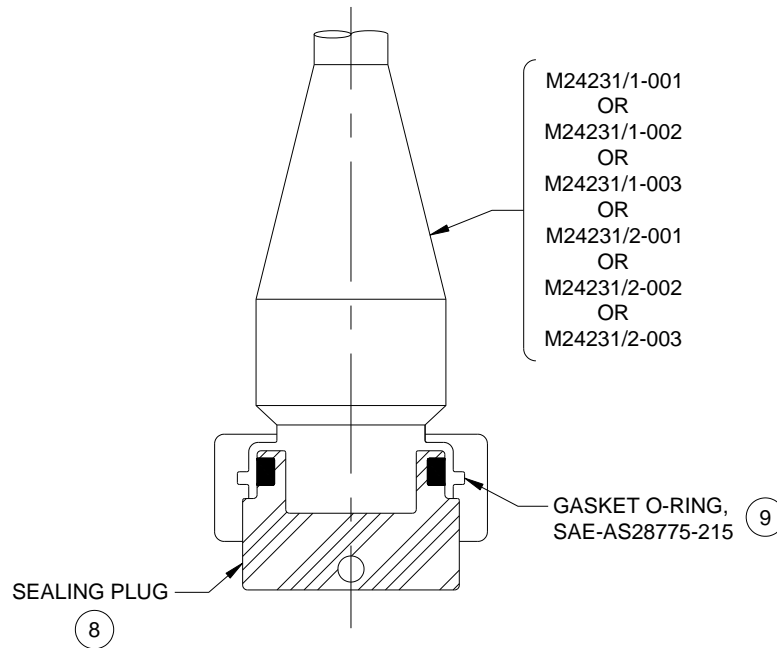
Sealing plug assembly – M24231/1-020. 15
